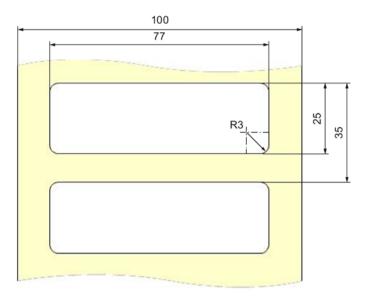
Dimension drawing RF690L (FCC, article number: 6GT2810-2AG10)
